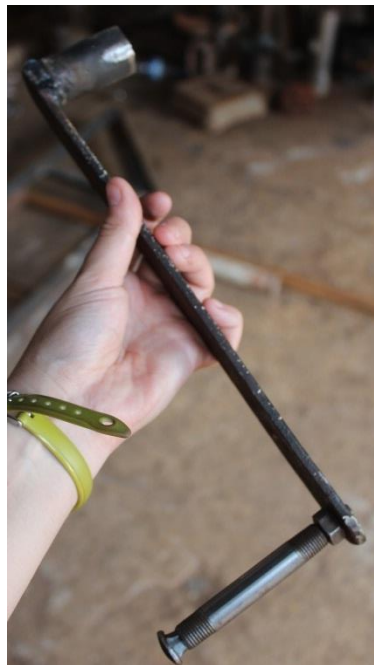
Cutting and filing the end of the driveshaft to interface with the handle.
